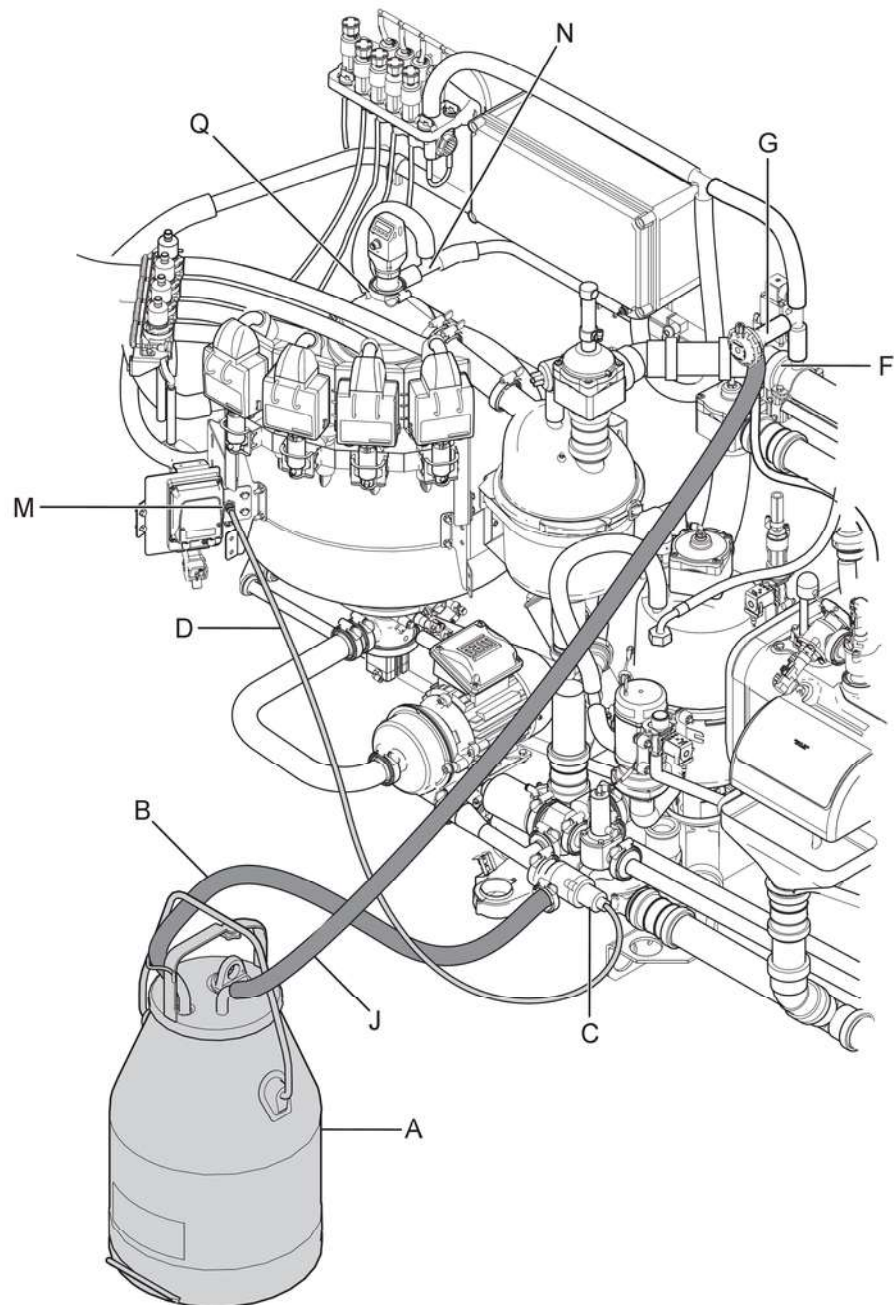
The milk meter MM27 calibration setup with the calibration valve assembly (H), vacuum and milk tubes (J) and a milk bucket.
